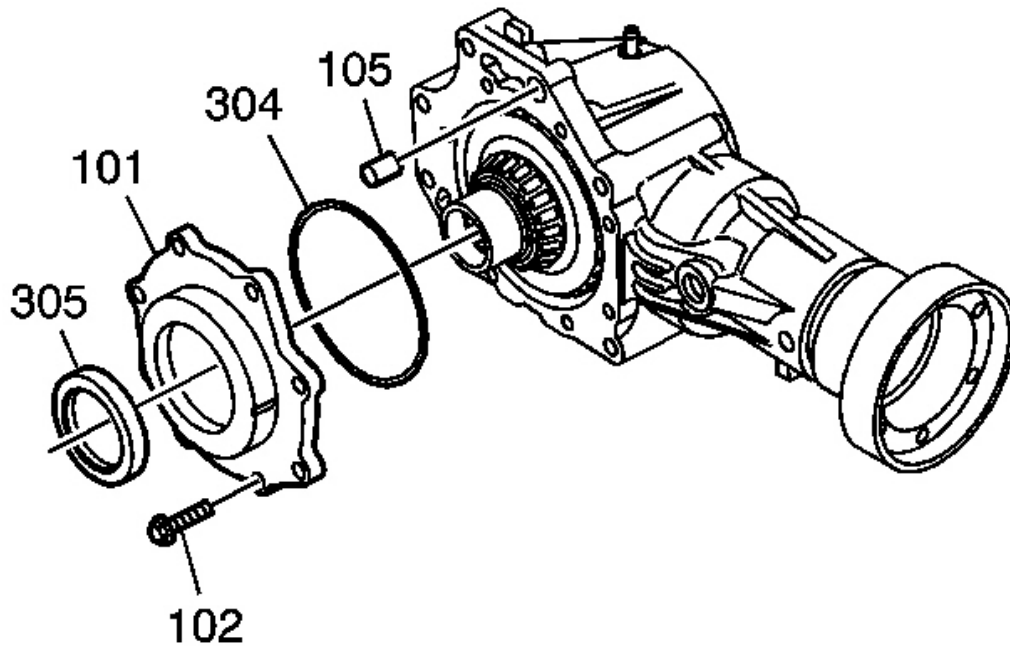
Removing Bolts, Cover, Seal, O-Ring & Locating Pin
